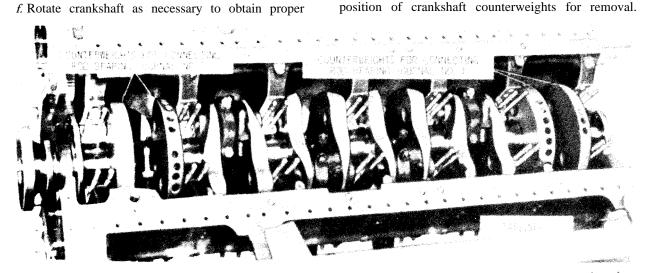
Crankshaft with main bearing caps removed showing correct position of crankshaft counterweights before removal or after installation of crankshafi..
